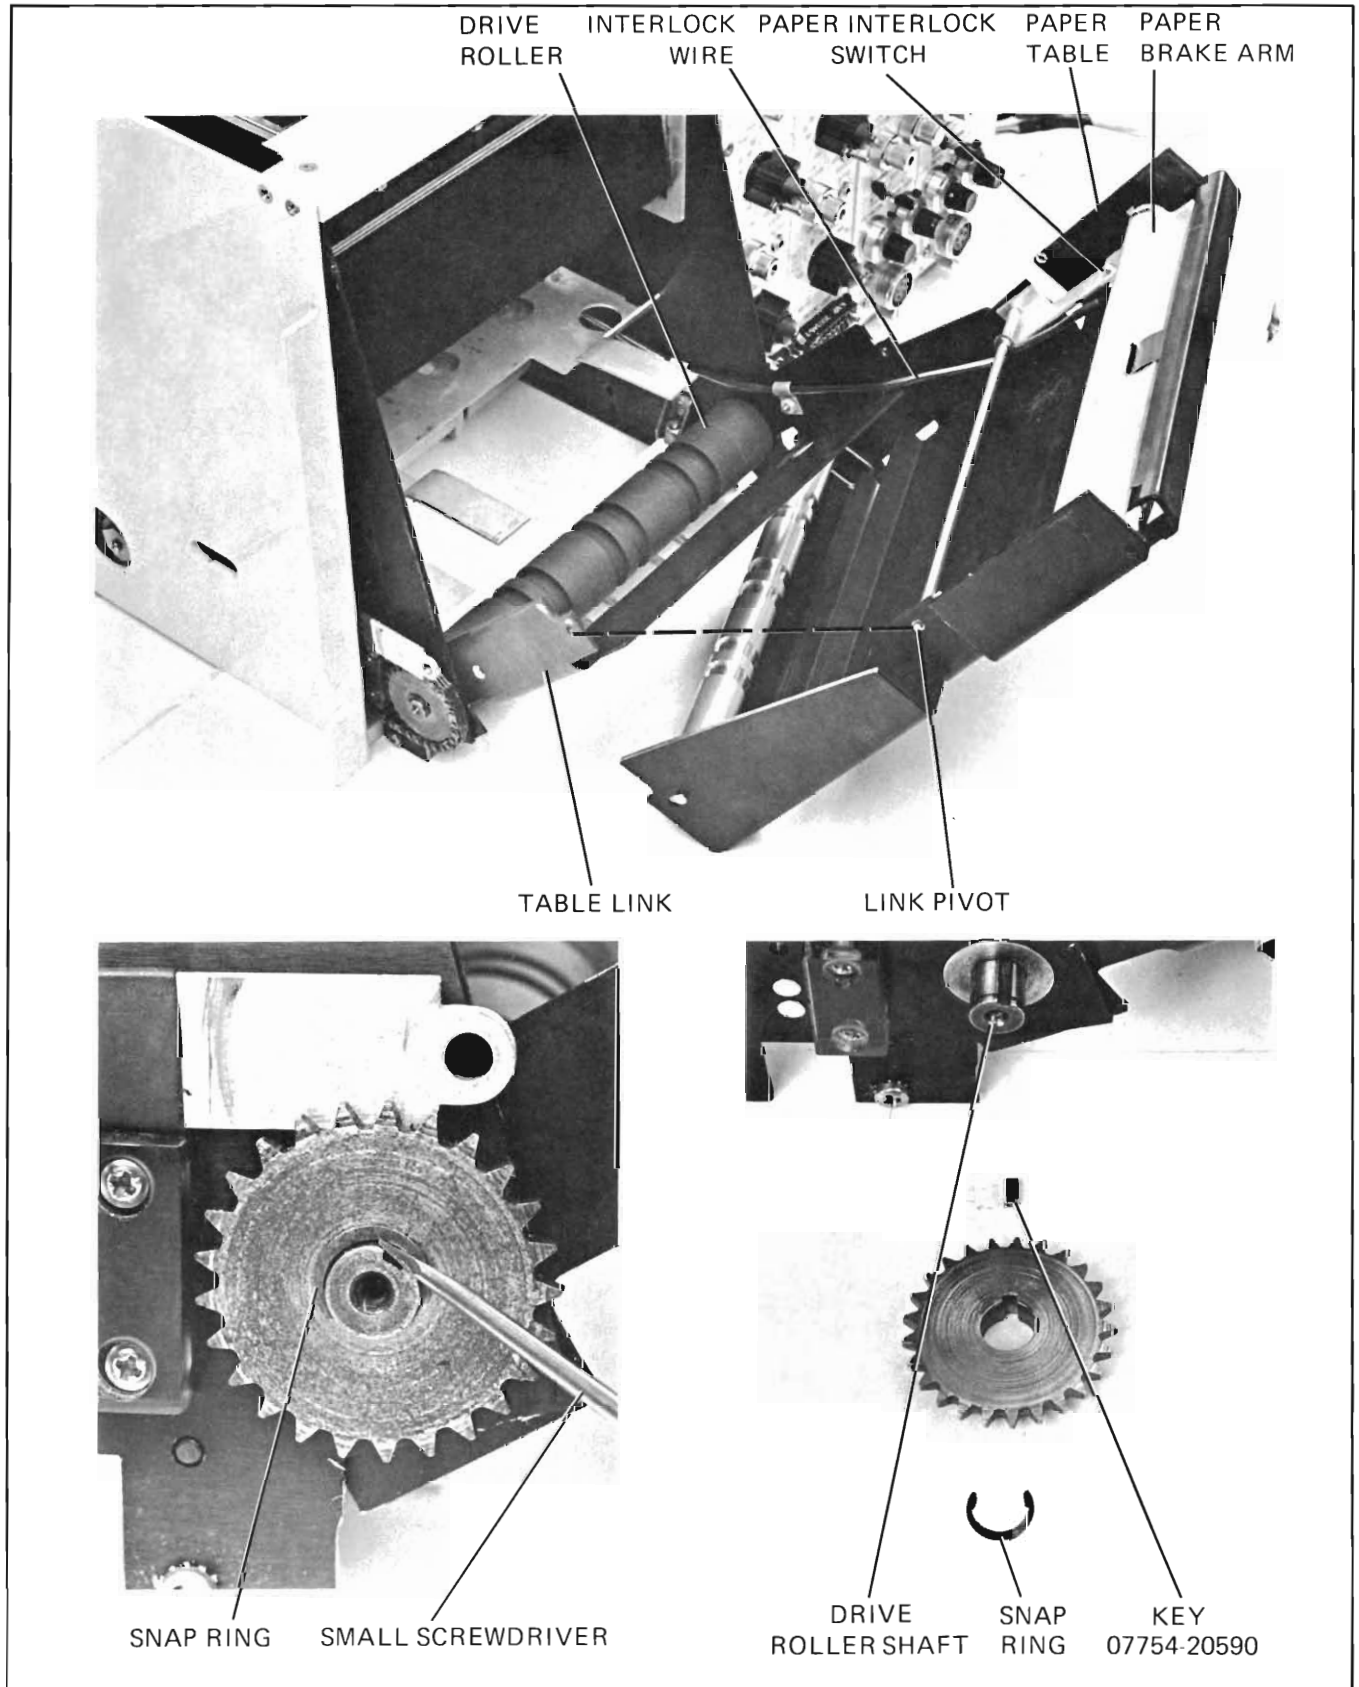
Drive Roller and Table Link Removal (Part 1)
